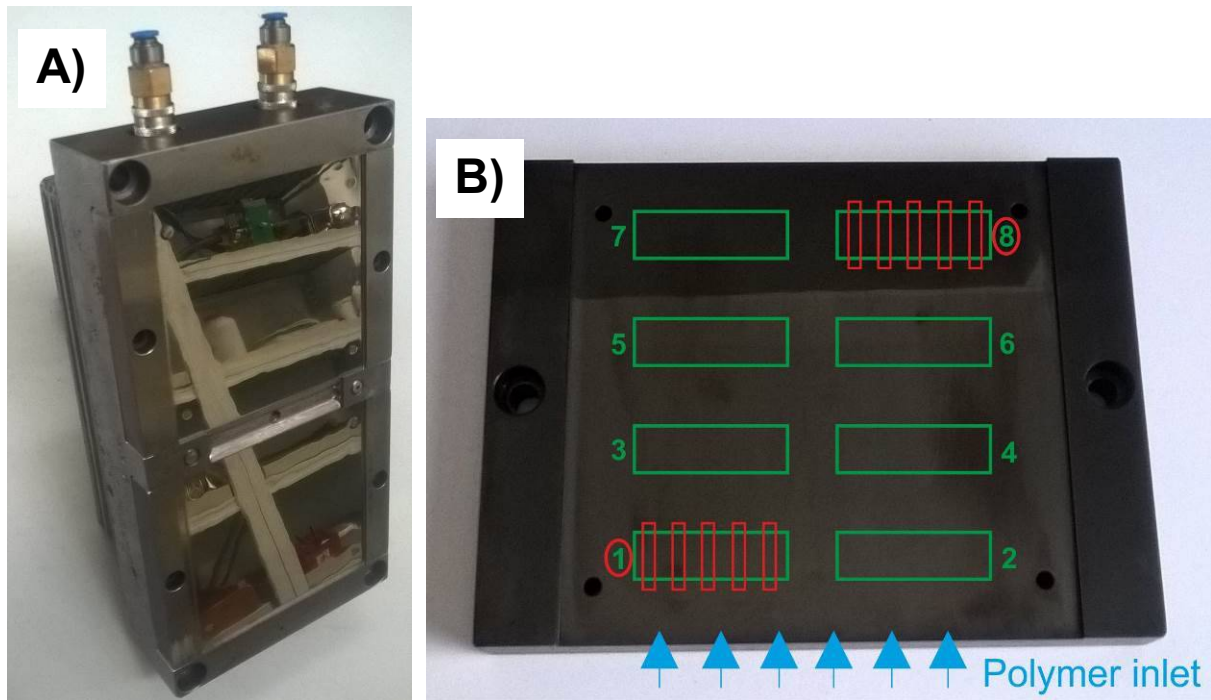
Injection mold; A) Mold insert with two cavities, B) Single mold cavity
